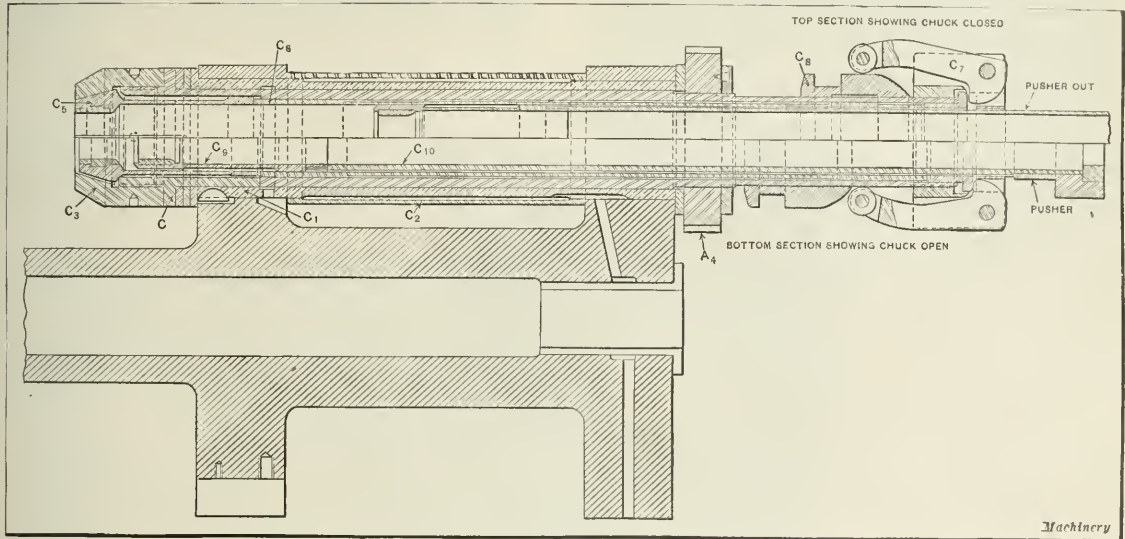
Section through Work-spindle, showing Chuck-closing and Stock-feeding Mechanism. Note that Stock-feeding and Chuck-closing Mechanisms are shown in Forward and Rear Positions—Upper Section shows Chuck closed and Feed Pusher withdrawn, and Lower Section shows Chuck Open and Feed Pusher advanced
